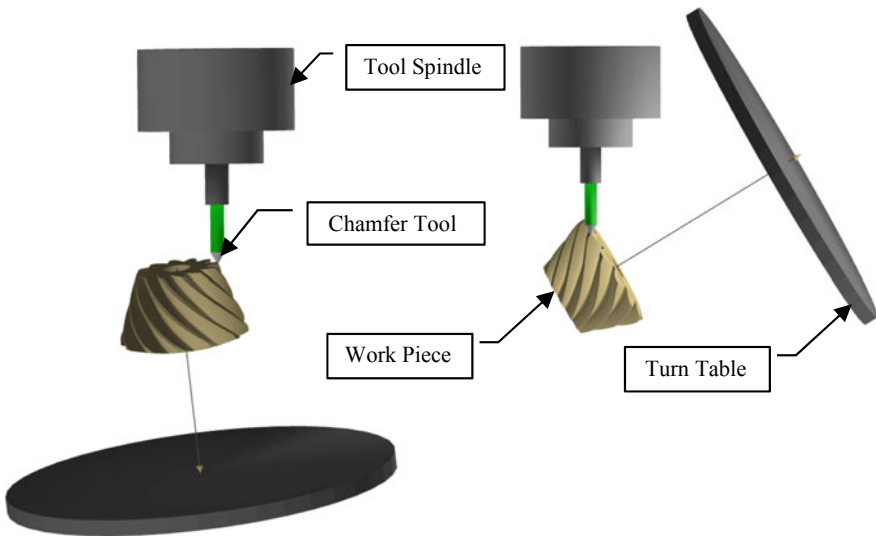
Chamfering Toe and Heel—small pitch cone angle spiral bevel gear
